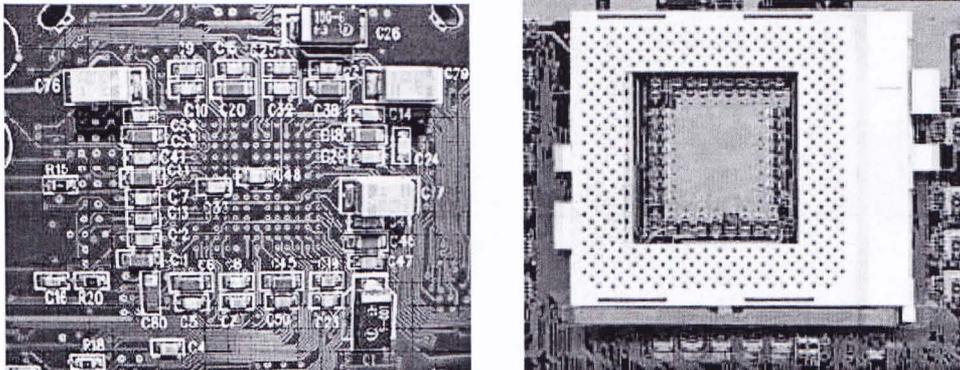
Surface mounted components and a CPU Socket of a Printed circuit board
